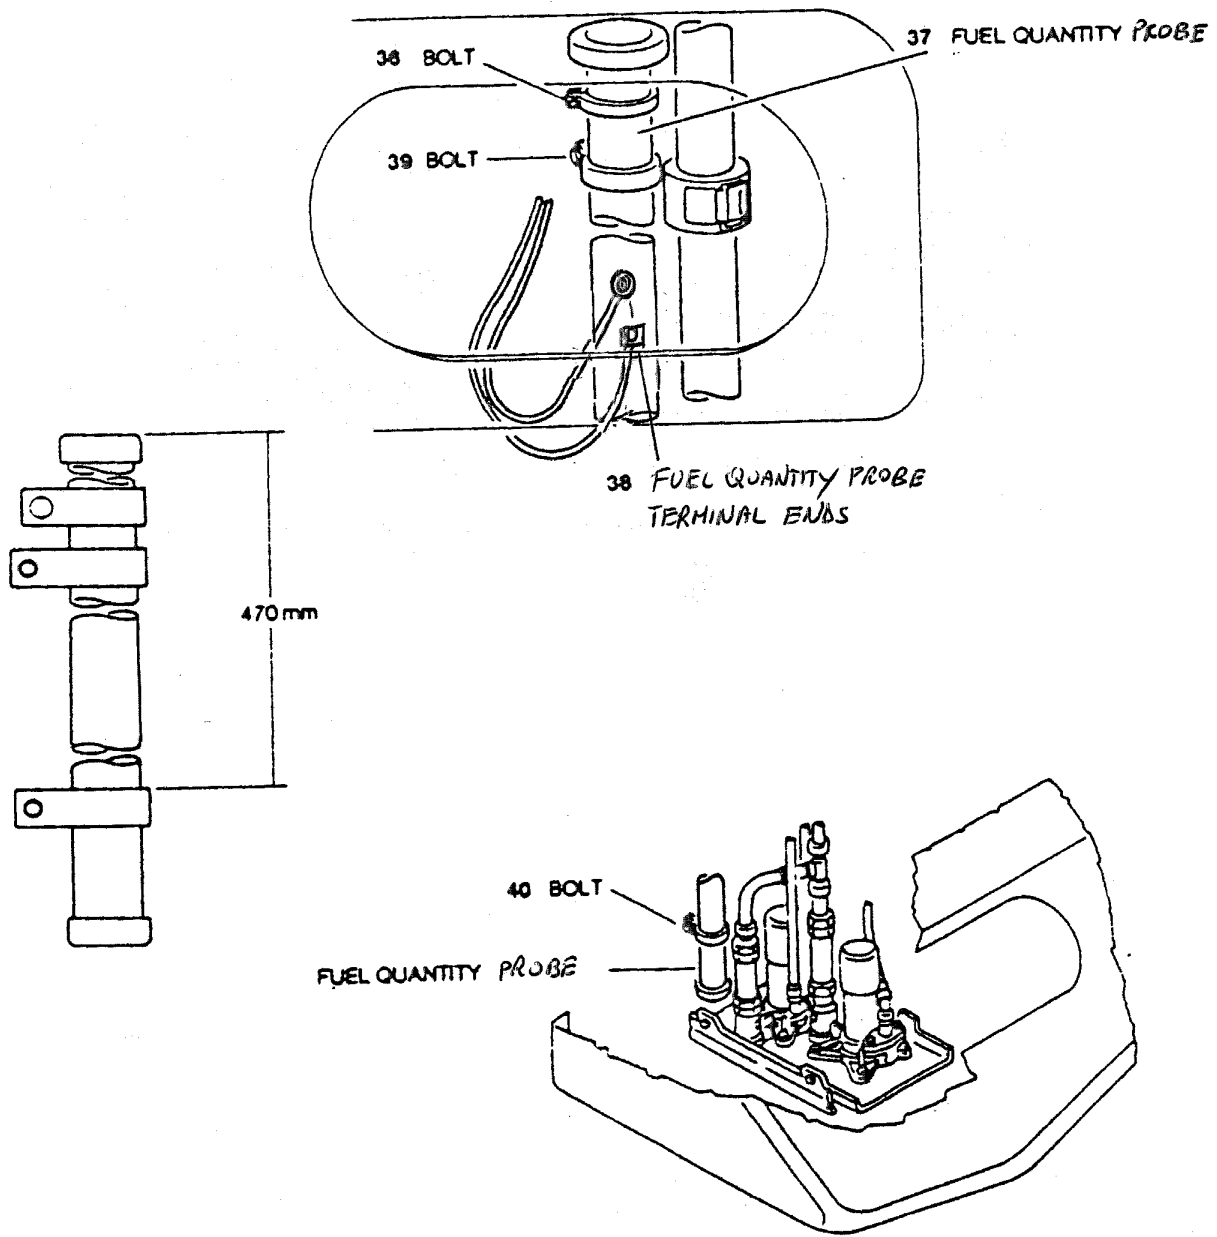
(Sheet 3) - Collector Tank Probes - Inspection/Check
